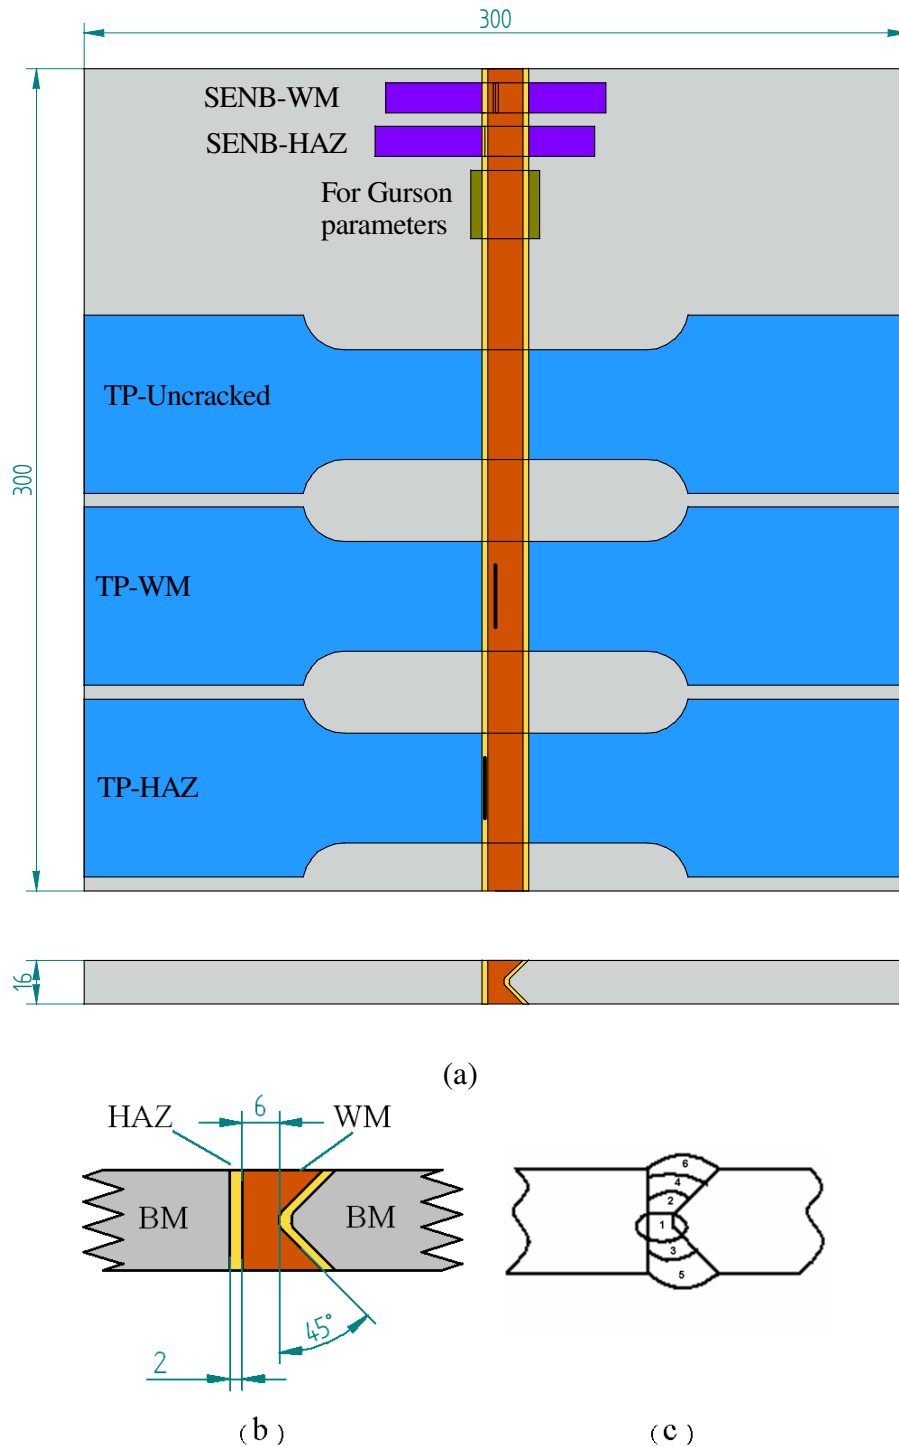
(a) geometry of welded plate with cut specimens, (b) detailed welded joint and (c) welding passes.
